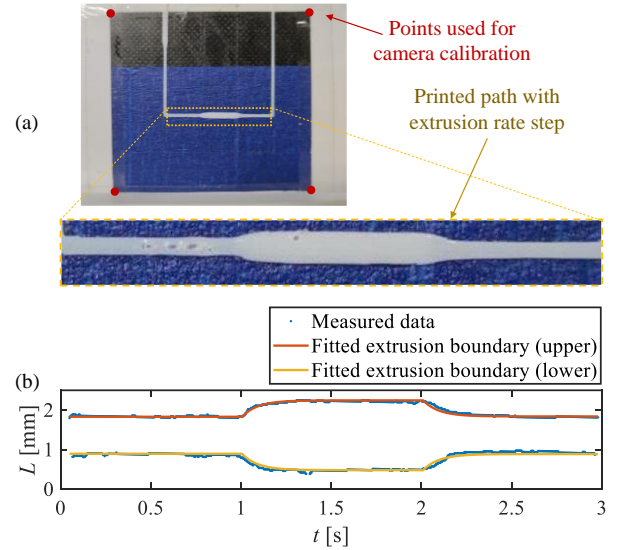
Identified Extrusion Dynamics: (a) Image of Printed part and (b) Extracted Boundary
